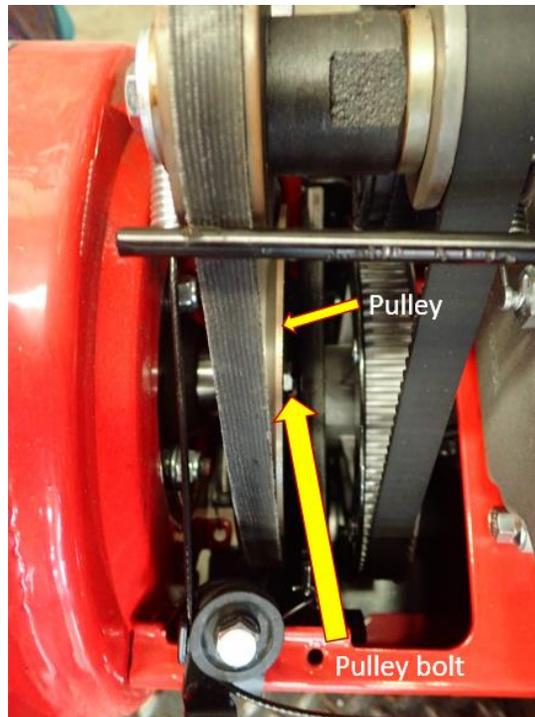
Once the 2 x 4 or stout metal rod is in the discharge chute, identify the pulley and pulley bolt; turn the pulley until the wood 2 x 4 or stout rod is wedged between the impeller and the housing so the pulley can no longer rotate.
